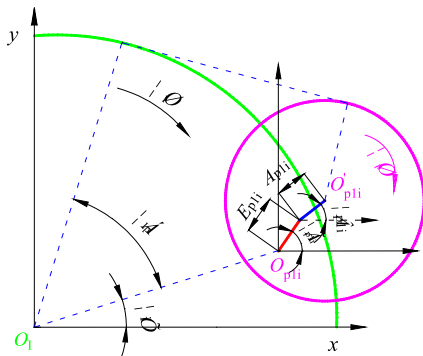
Manufacturing and installation error of i-th small star gear.
